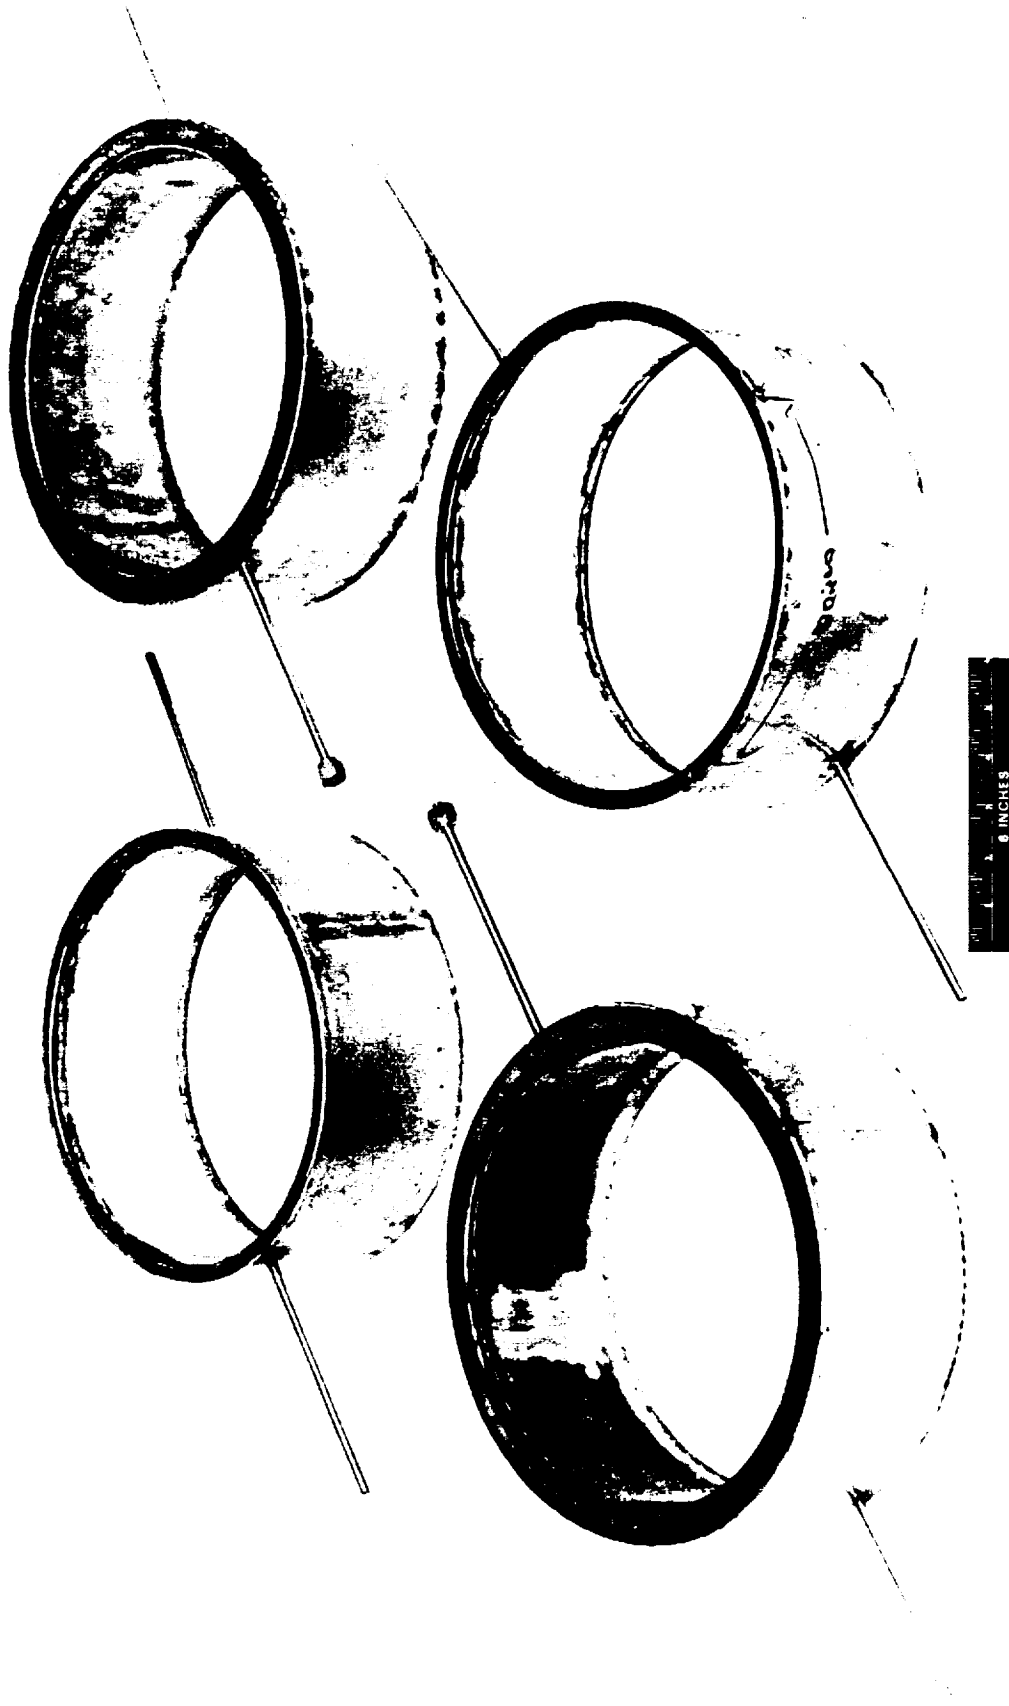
Cylindrical Bag-Braze Nozzle Sample Assembly
